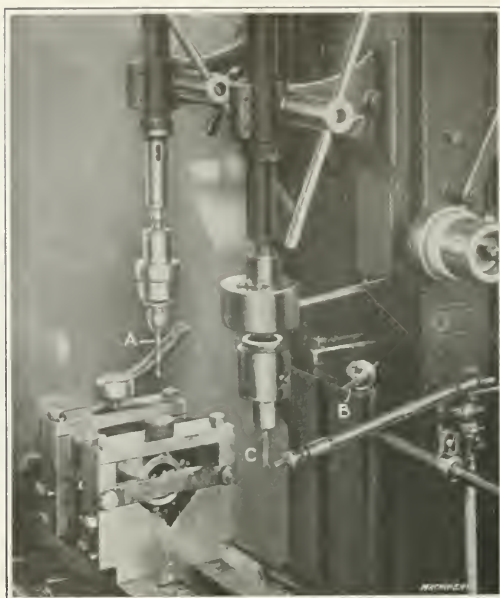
Drilling and tapping Hole for Fuse Fixing Screw
